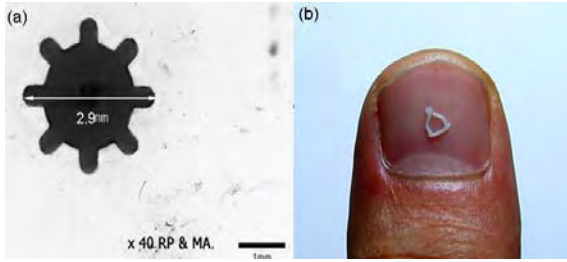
Fabricated gear and stapes : (a) microscope picture of micro gear (b) stapes on a thumb
